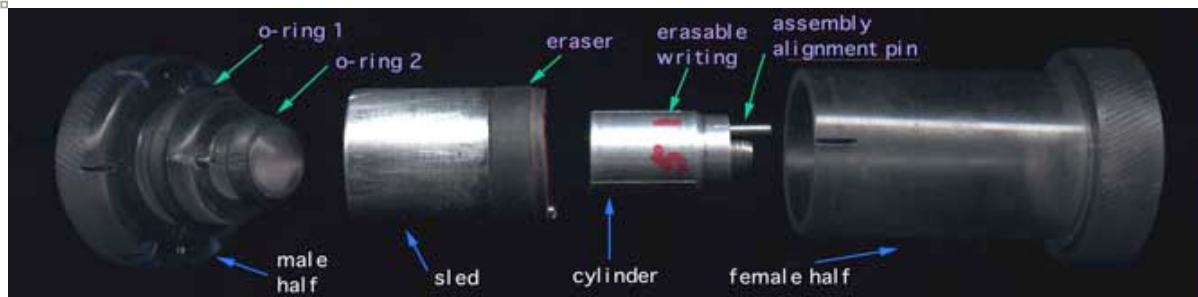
Exploded view of a different prototype Magic Slate Seal.
